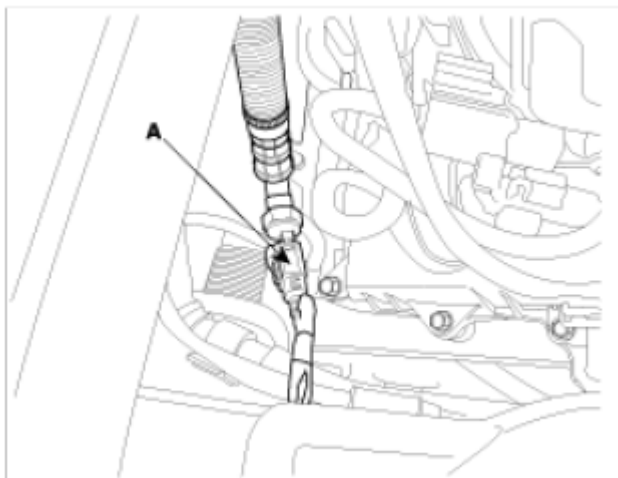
Identifying RH Oxygen Sensor Connector
